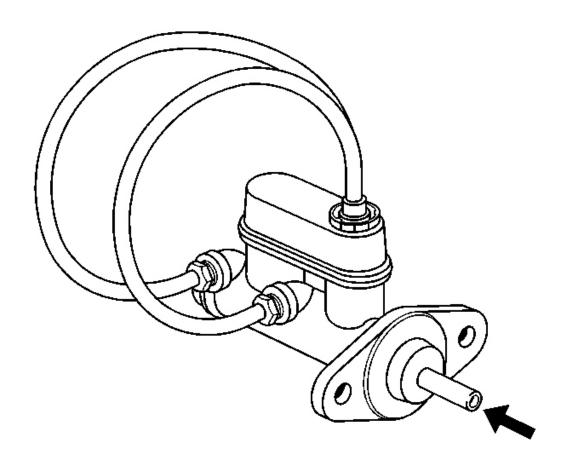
Bleeding Master Cylinder Courtesy of GENERAL MOTORS CORP.
